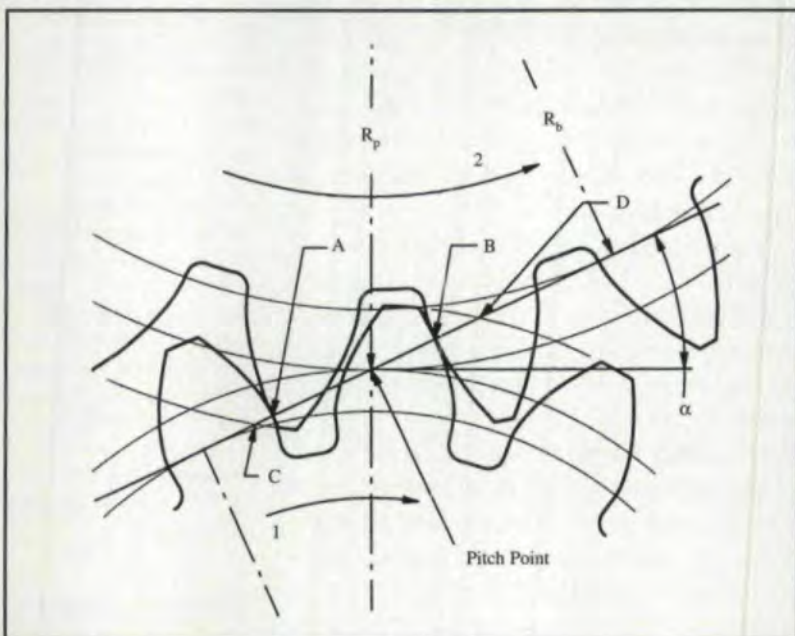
Base tangent line. Courtesy of Van Gerpen and Reece Engineering.
